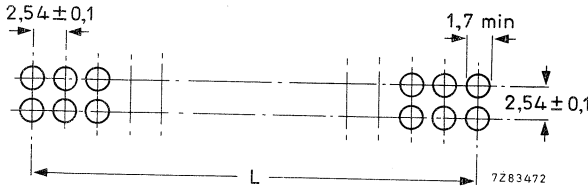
Hole pattern for double-row bottom-entry sockets; see Table 1 for dimension L.
